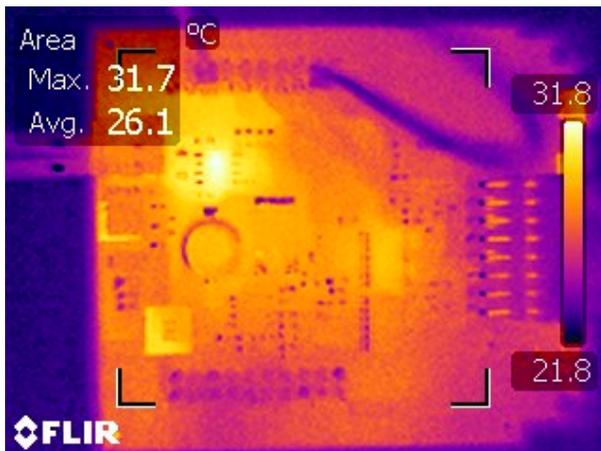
Thermal Image of PCB While Driving the Fold Motor
